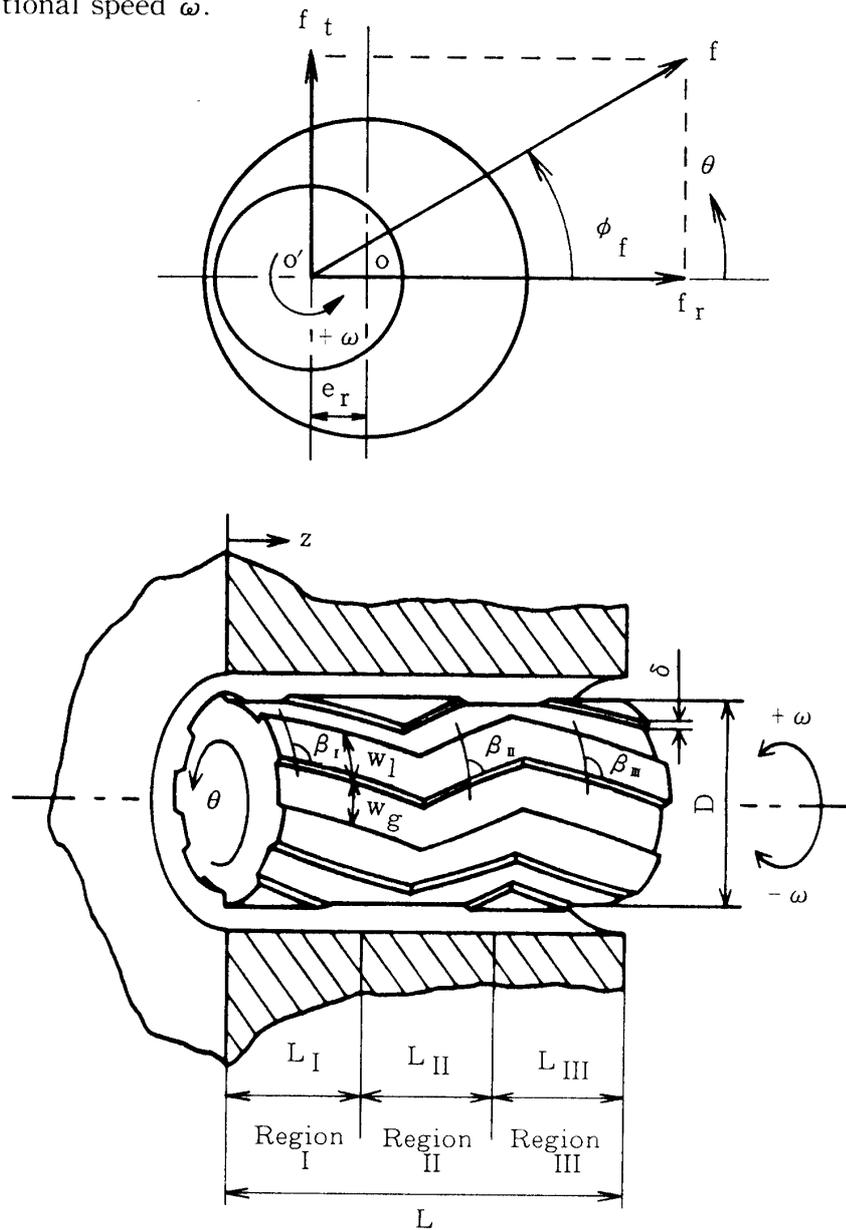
The reversible rotation type herringbone grooved journal bearing.
